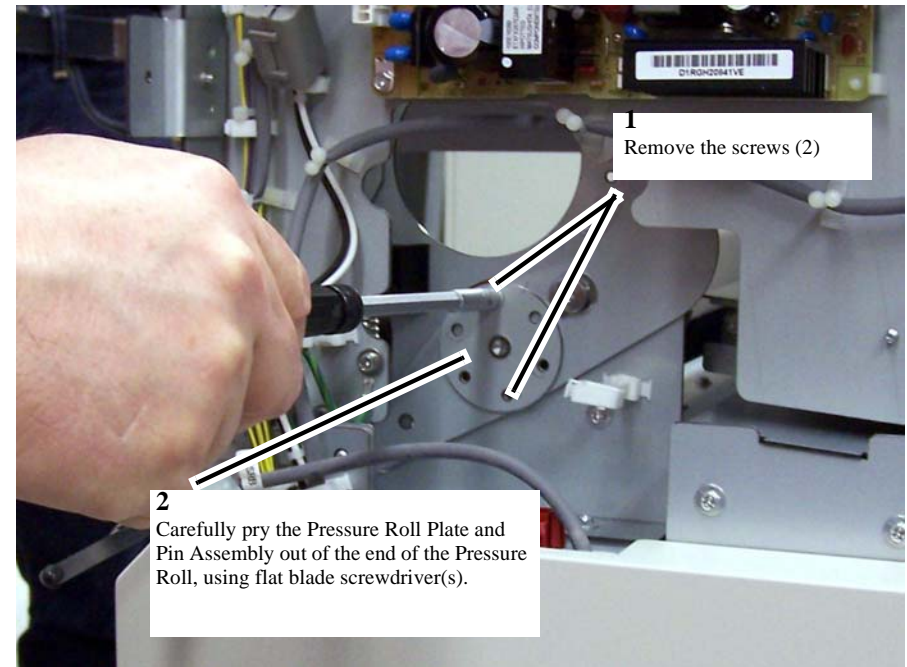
Removing the left end Pressure Roll Plate and Pin Assembly
